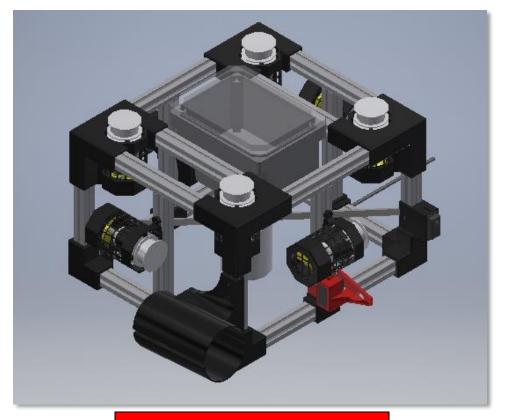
CAD Mechanical Drawing of Complete Vehicle
